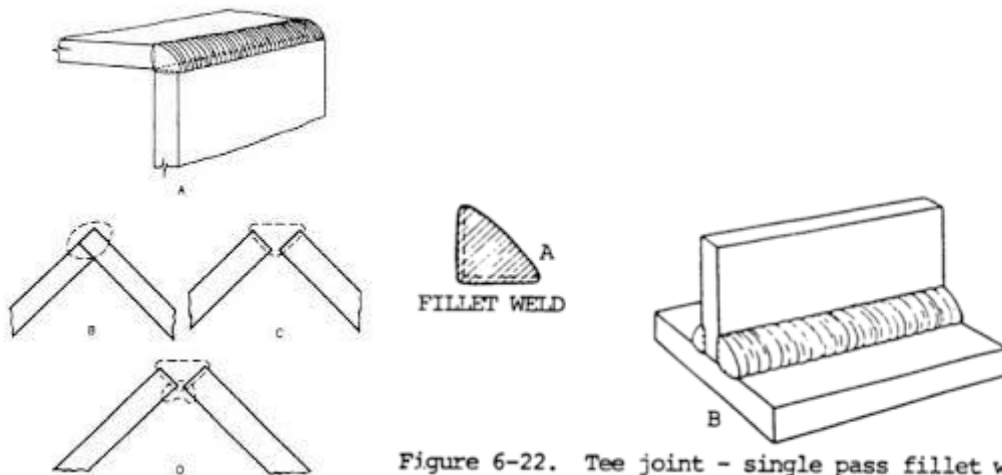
Tee joint - single pass fillet weld.
